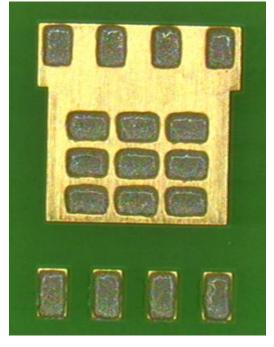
Universal Footprint Showing Solder Mask and Optimized Solder Stencil Details
